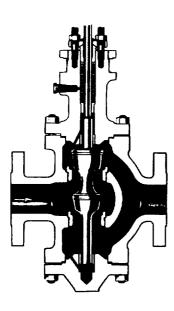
Type 470-A control valve with single port, top and bottom guided Throttle Plug valve plug.
